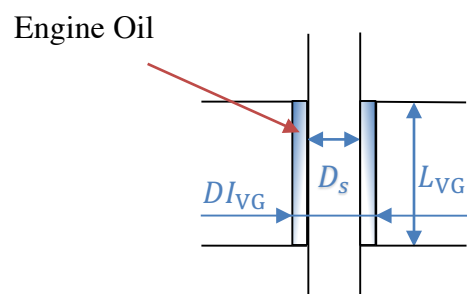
Schematic representation of the valve stem, the valve guide, and the engine oil between them.
